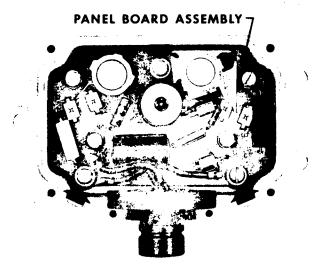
Underneath side of regulator with bottom plate removed. Arrows identify panel mounting screws.
